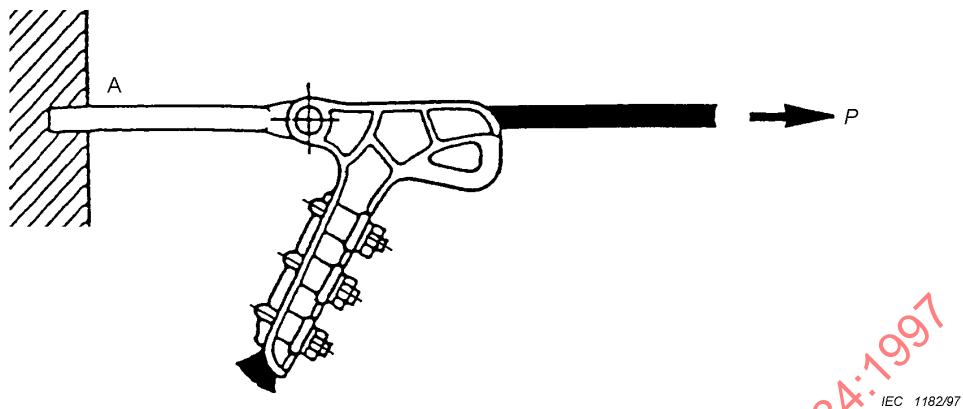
Tension clamps and tension joints – mechanical damage and failure load test: diagram showing the typical application of load
